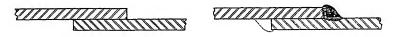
Lap weld. The second weld necessary to form a double lap weld is indicated by a dotted line.
